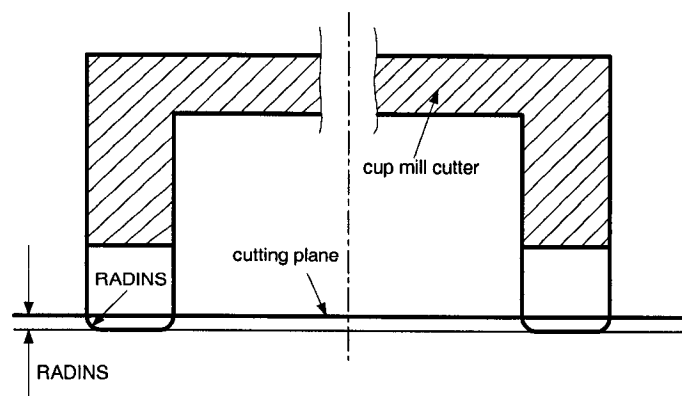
The corresponding cutting plane on the cup mill cutter (RADINS – insert radius)
